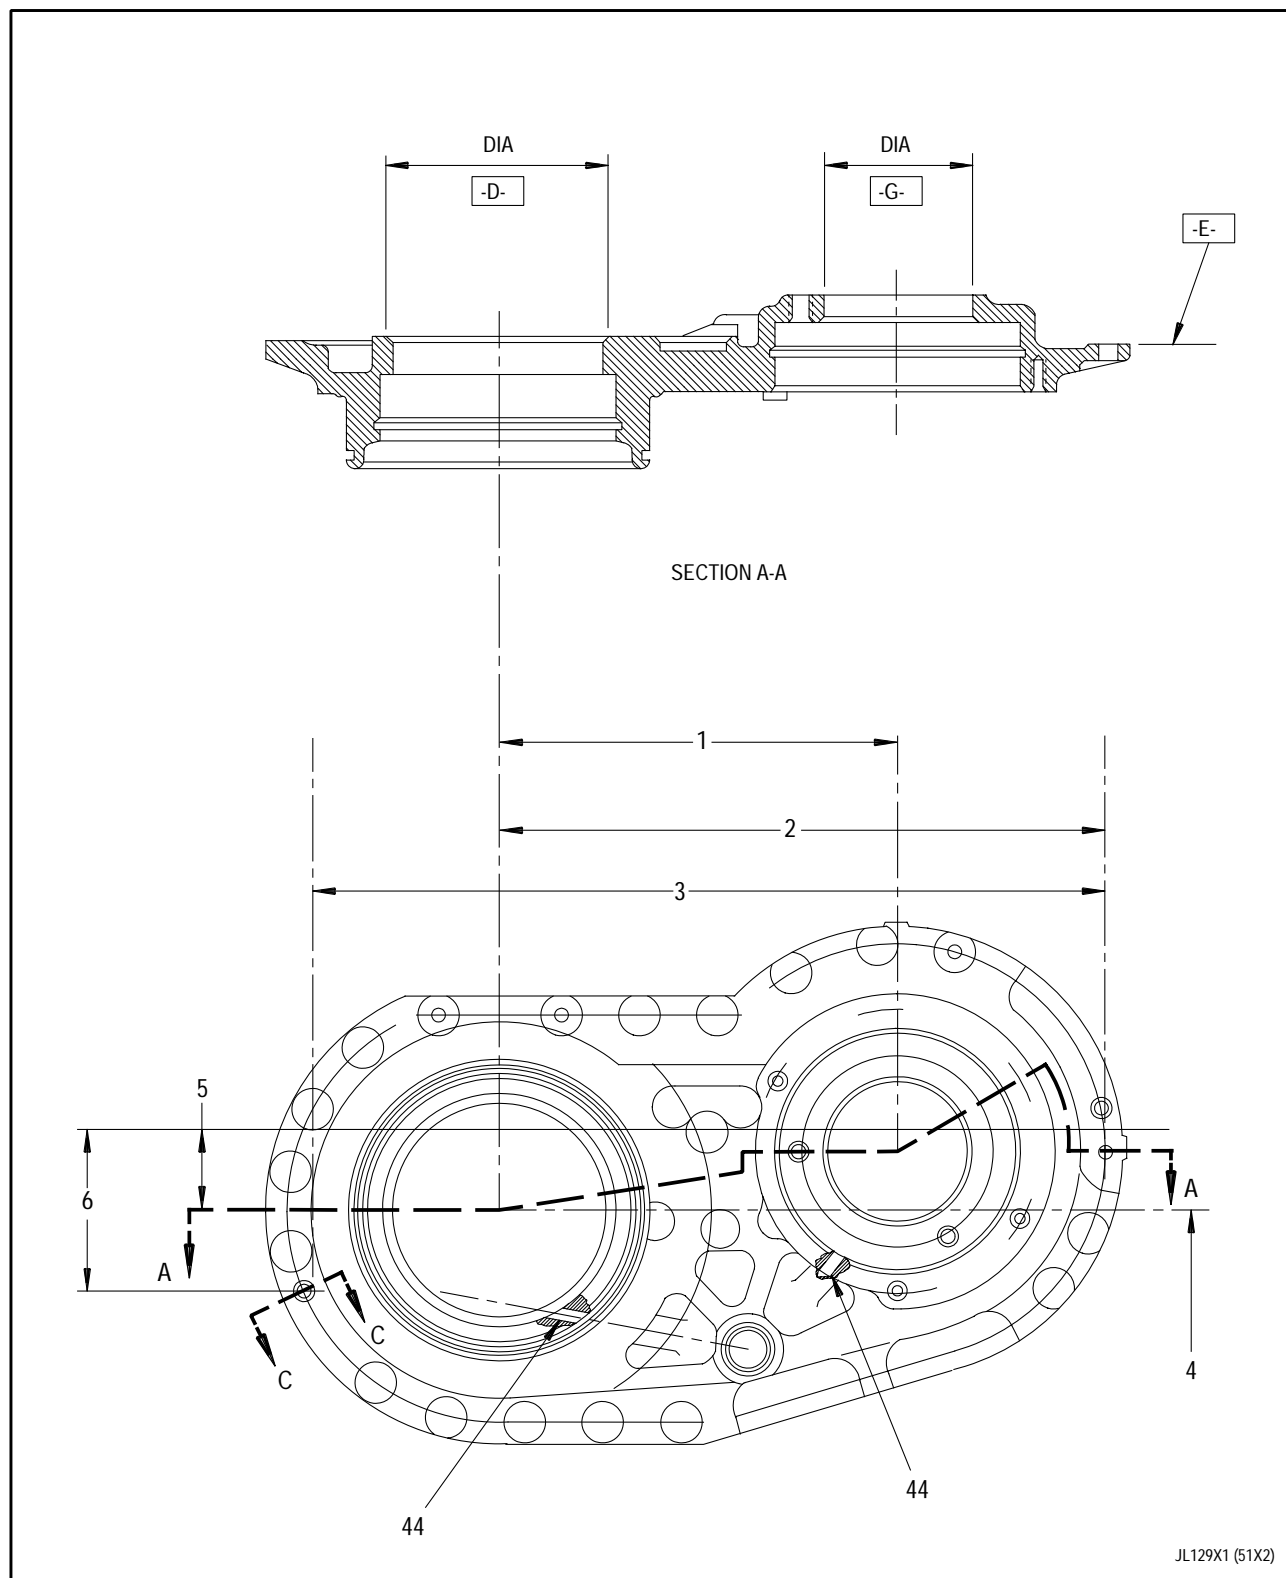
Gearbox (Front) Housing Assembly - Dowel Pin Holes Repair (Sheet 1 of 4)
